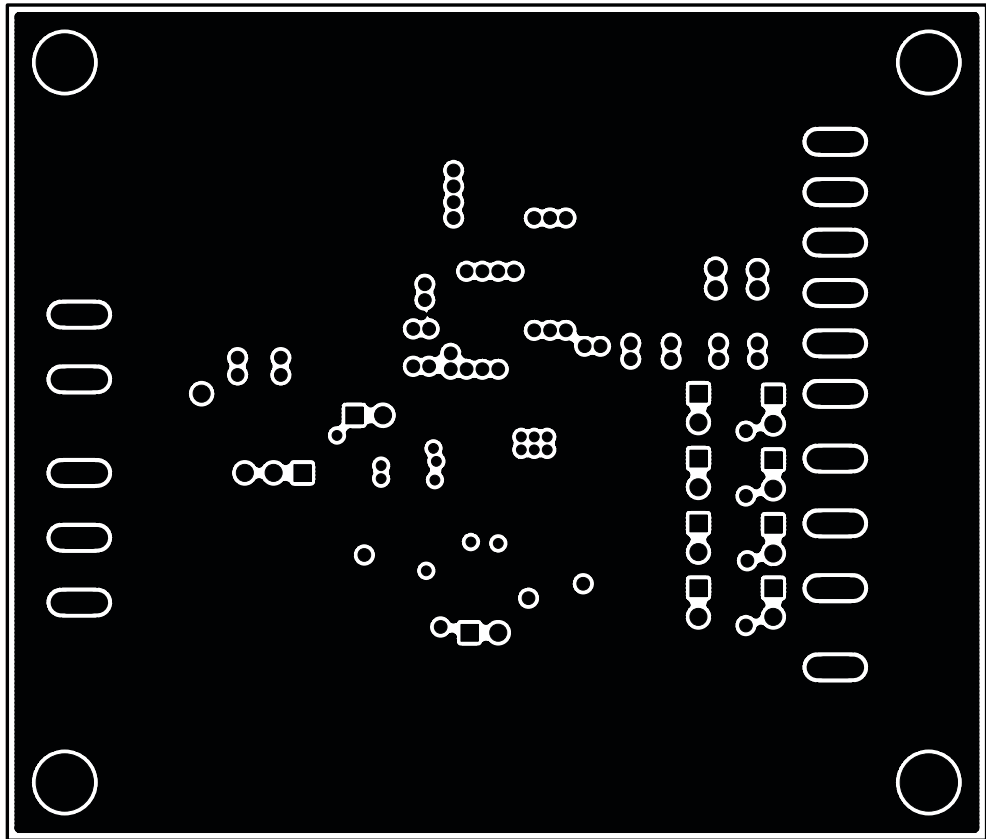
MAX16814 EV Kit PCB Layout—SGND Layer 2
